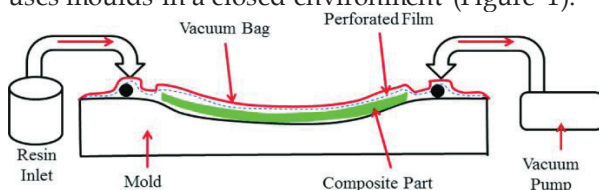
Vacuum assisted resin transfer moulding (VARTM) technique
